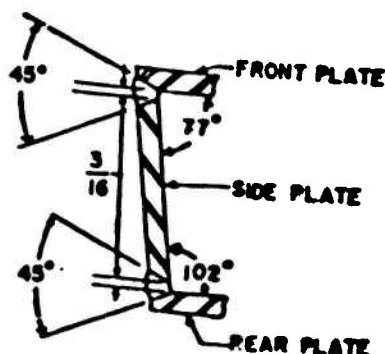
Cross Section of Applique Section Fabricated with a Full-penetration Weld Joint.
